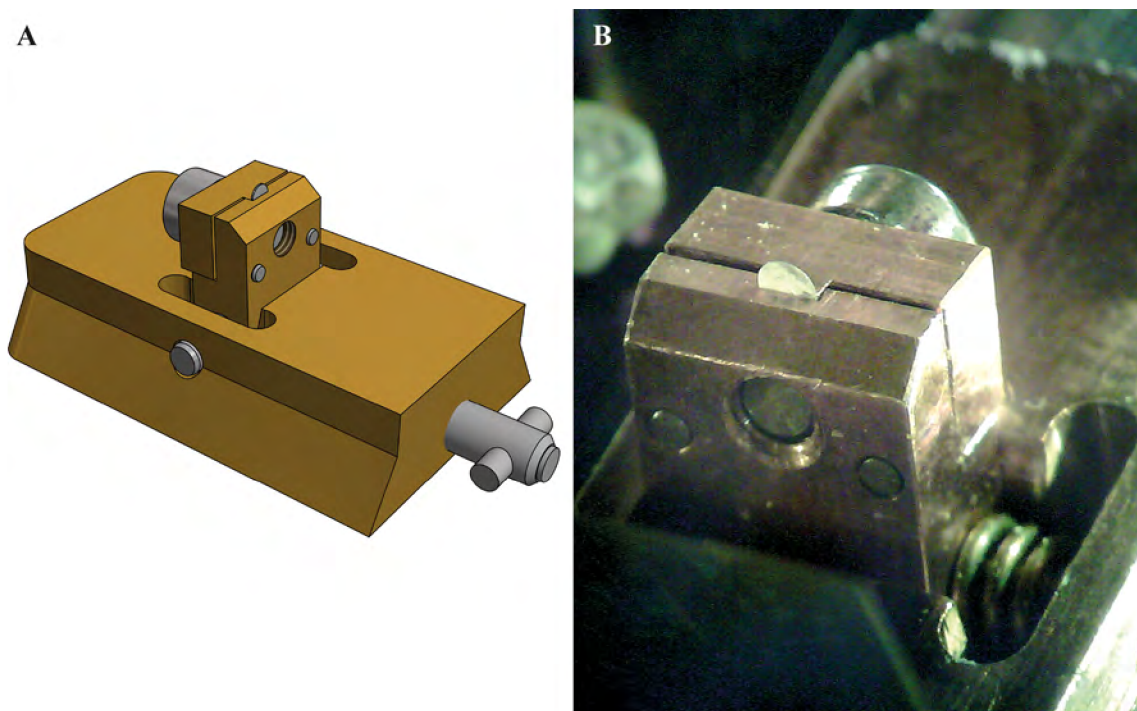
A holder for gripping and perpendicular cross freeze-fracturing of the 1.4 mm sapphire disc compatible with the ALTO 2500 cryo-preparation system. (A) schematic drawing and (B) actual picture when performing the experiments in the cryo-preparation chamber.
